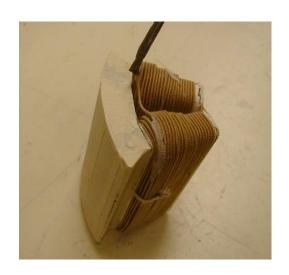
Wound C-Core Prepared for Assembly into Mold
